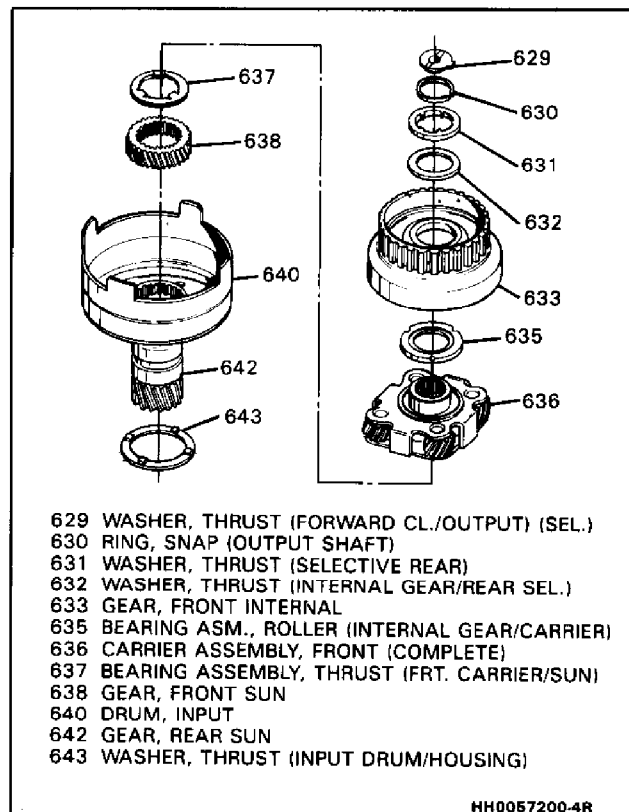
Removing Front Internal Gear, Carrier and Input Drum
